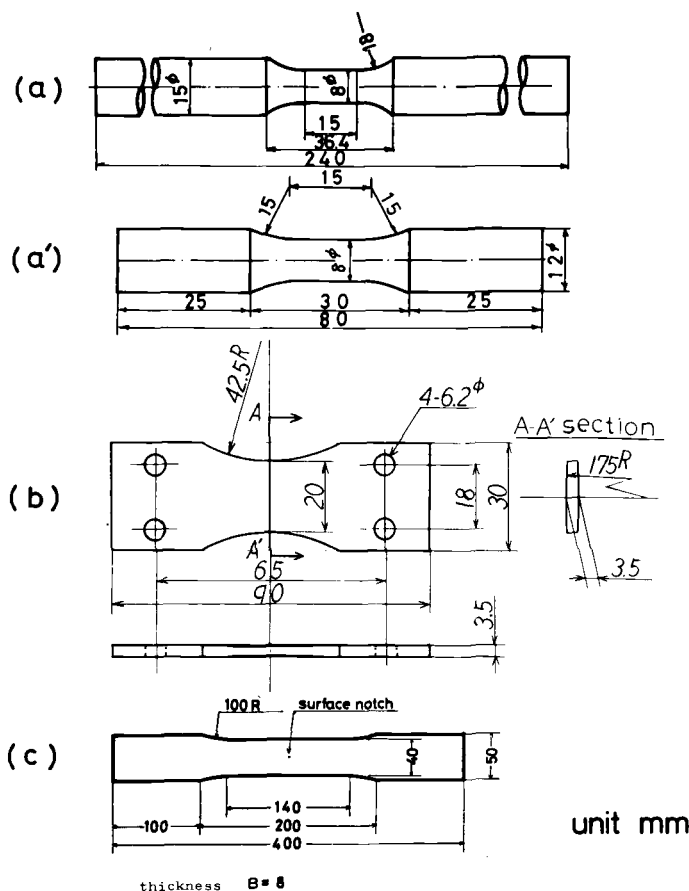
Configurations of specimens: (a) Specimens for rotating bending fatigue tests (for Material A, mild steel); (a') Specimens for rotating bending fatigue tests (for Material B, mild steel); (b) specimens for out-of-plane bending fatigue tests; (c) specimens for in-plane tension fatigue tests (with a small round hole surface notch).
